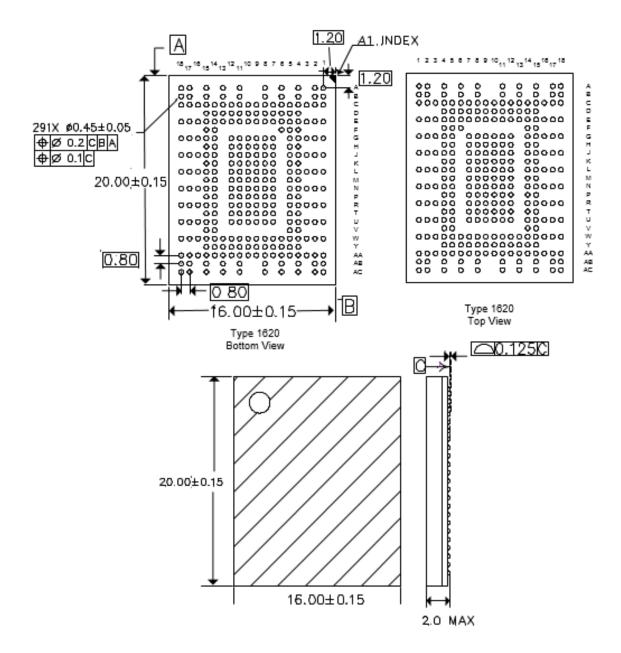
M.2 Type 1620-S5 Mechanical Outline Drawing Example
